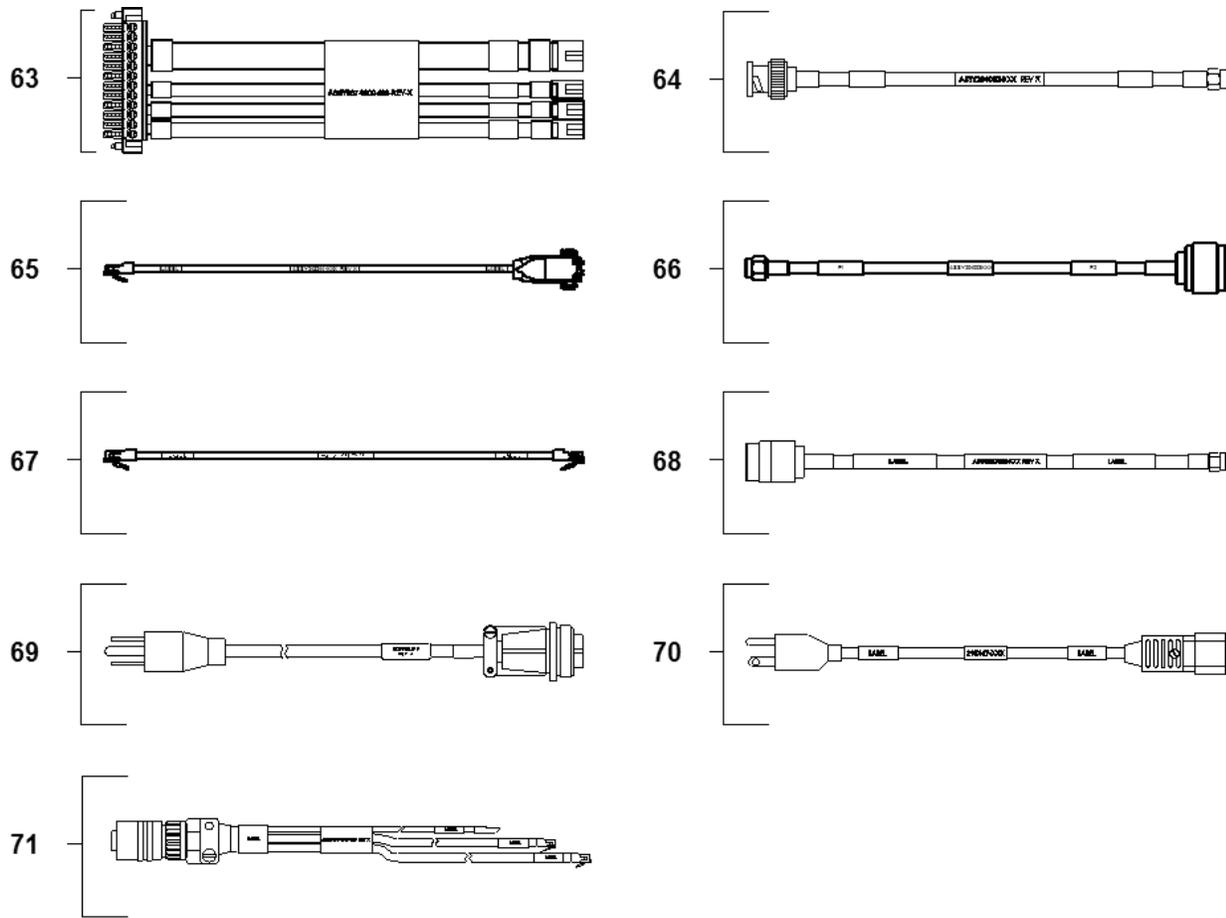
Electronics Components Assembly - Group 0301 (Sheet 8 of 9).
